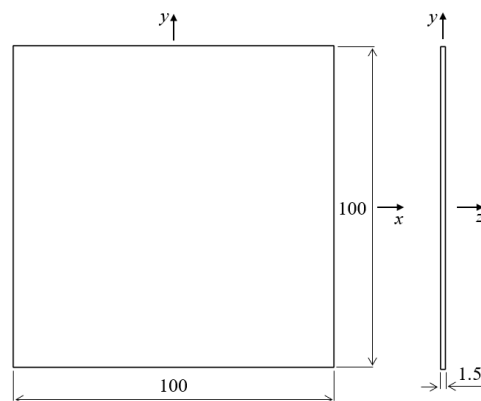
Test specimen for electrical tests (dimensions in mm).
